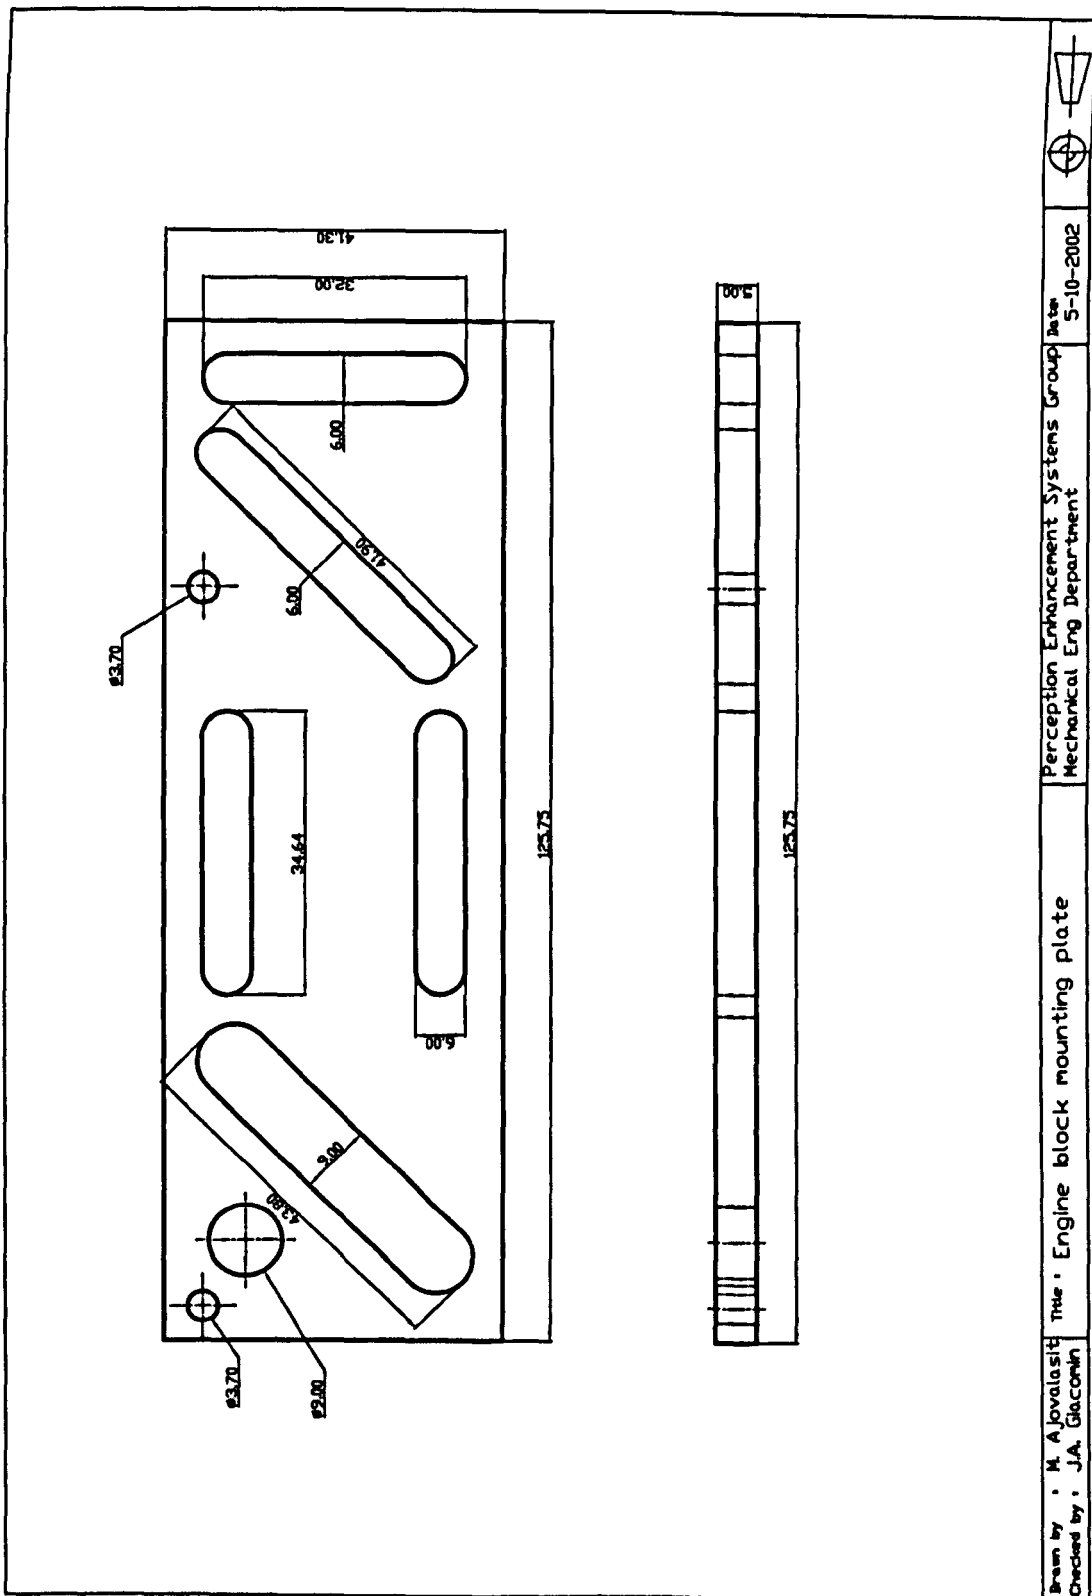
Geometrical dimensional of the engine mounting plates used to record the engine idle vibration on the test automobiles.
